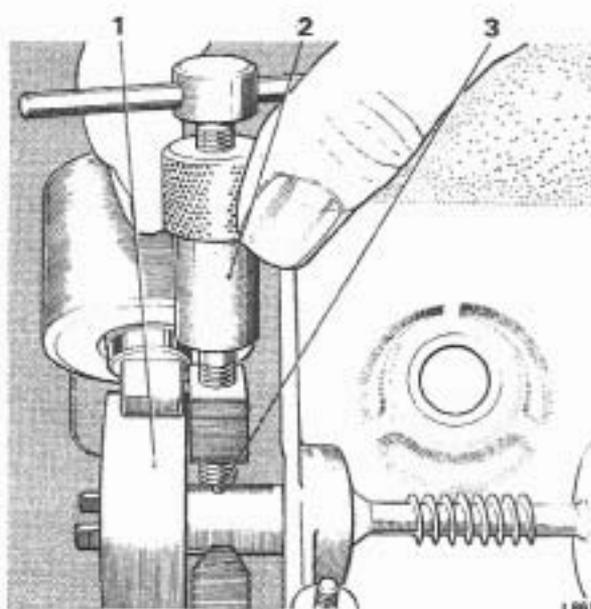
FITTING THE BRAKE DRUM ROLL PIN (EARLY CARS)
